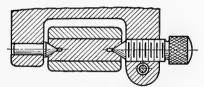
Pivot bearing with shouldered center pin and adjustable cone-pointed screw with lock.
